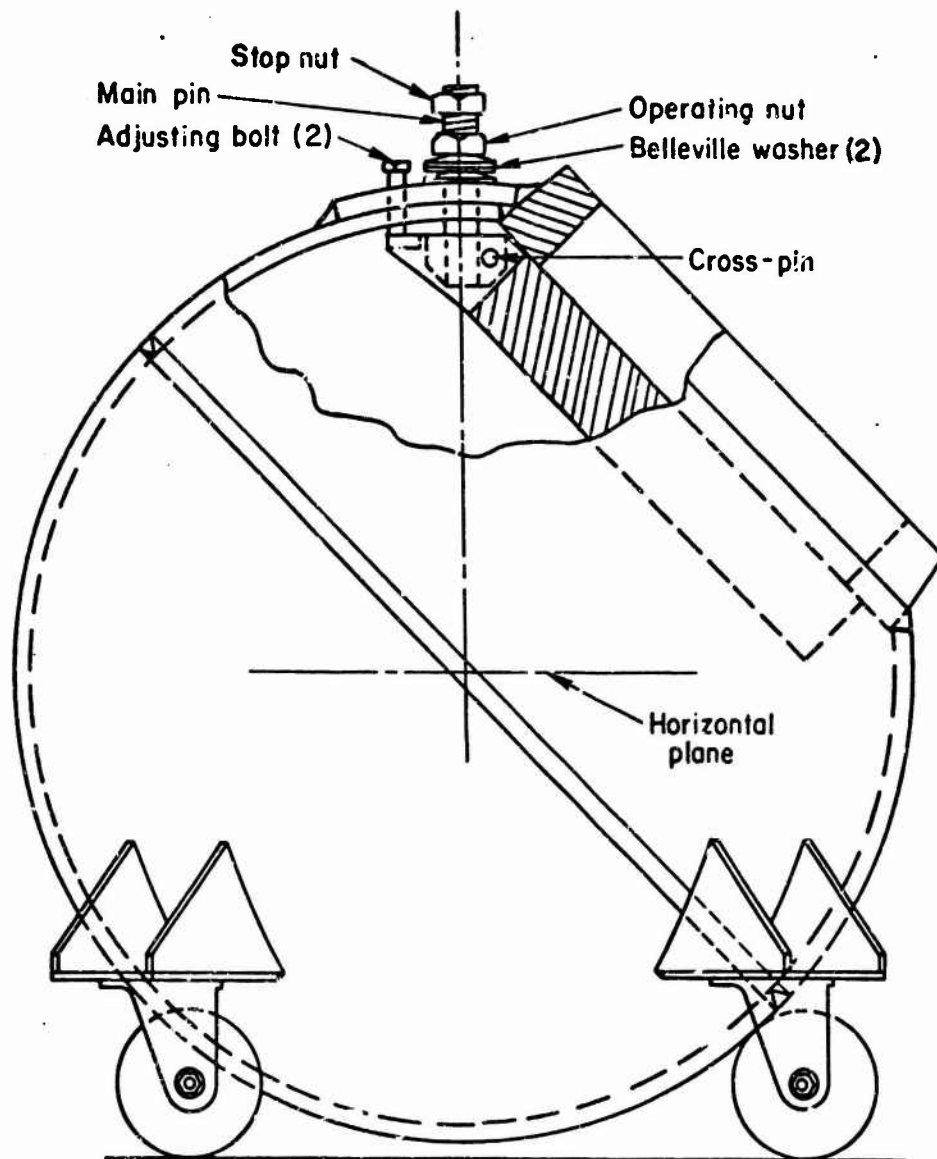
SCHEMATIC SIDE VIEW OF SPHERICAL CONTAINMENT VESSEL WITH SINGLE-PIN DOOR SUPPORT MECHANISM
